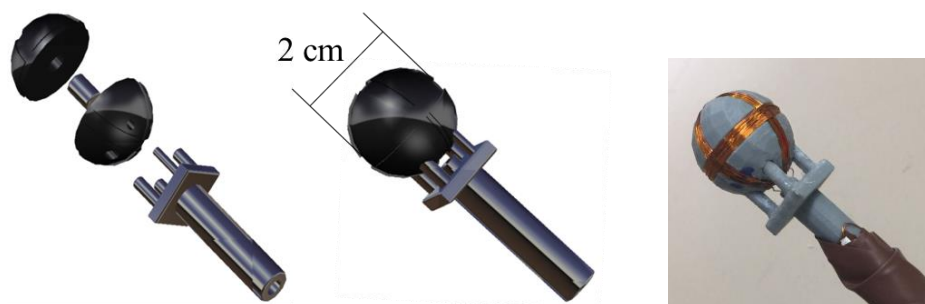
Left to right: design of the sensor, final 3D CAD model and realized sensor.
